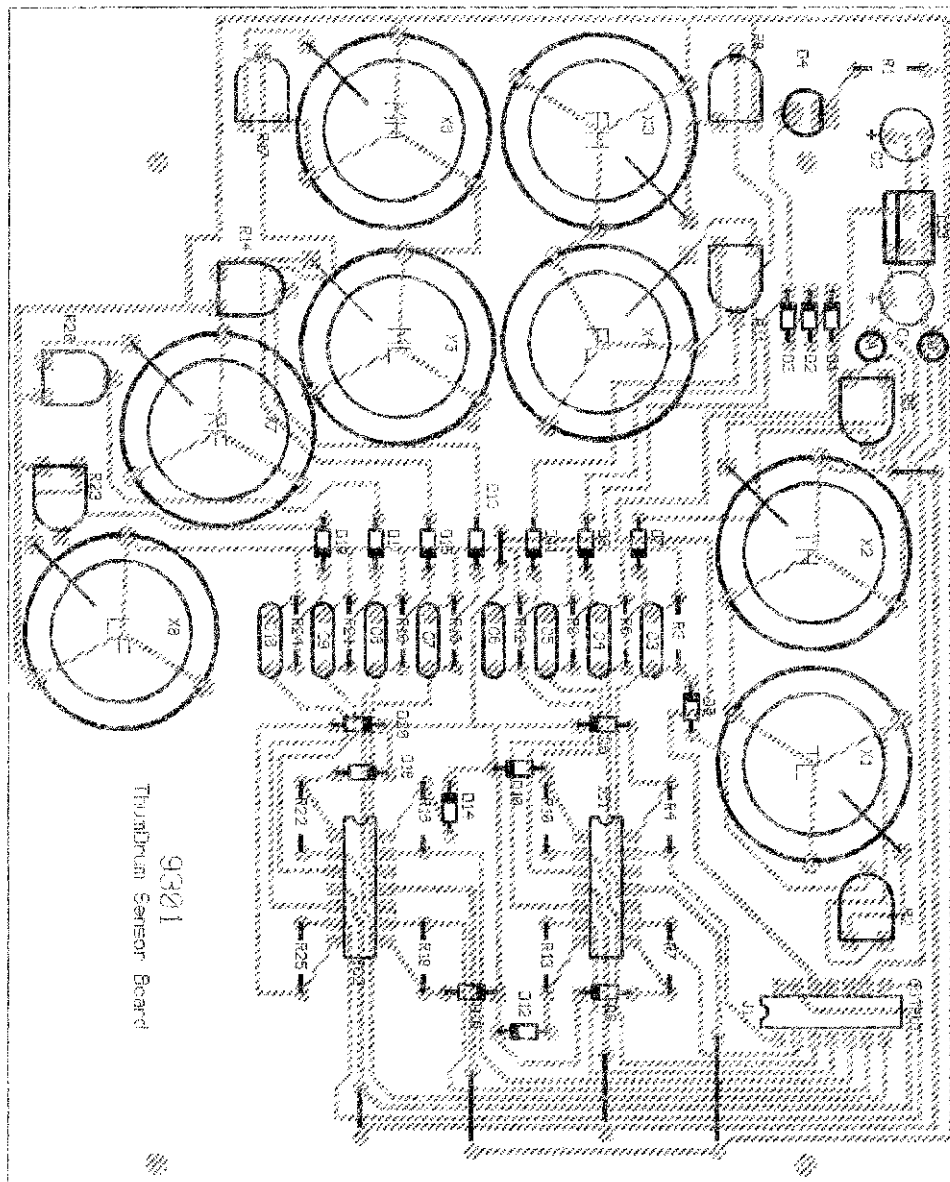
This phantom view of the circuit board conductors will be useful if you have to trace out the circuit.
